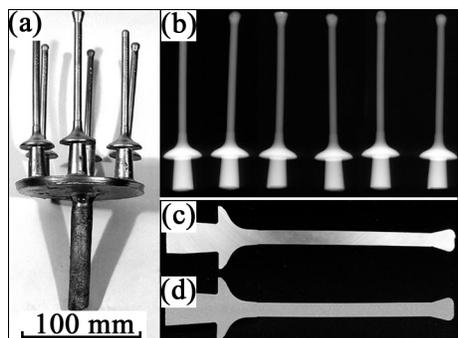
(a) Mould of counter-gravity cast Al valves; (b) radiograph showing absence of defects; (c) polished macro-section; (d) etched macro-section.
